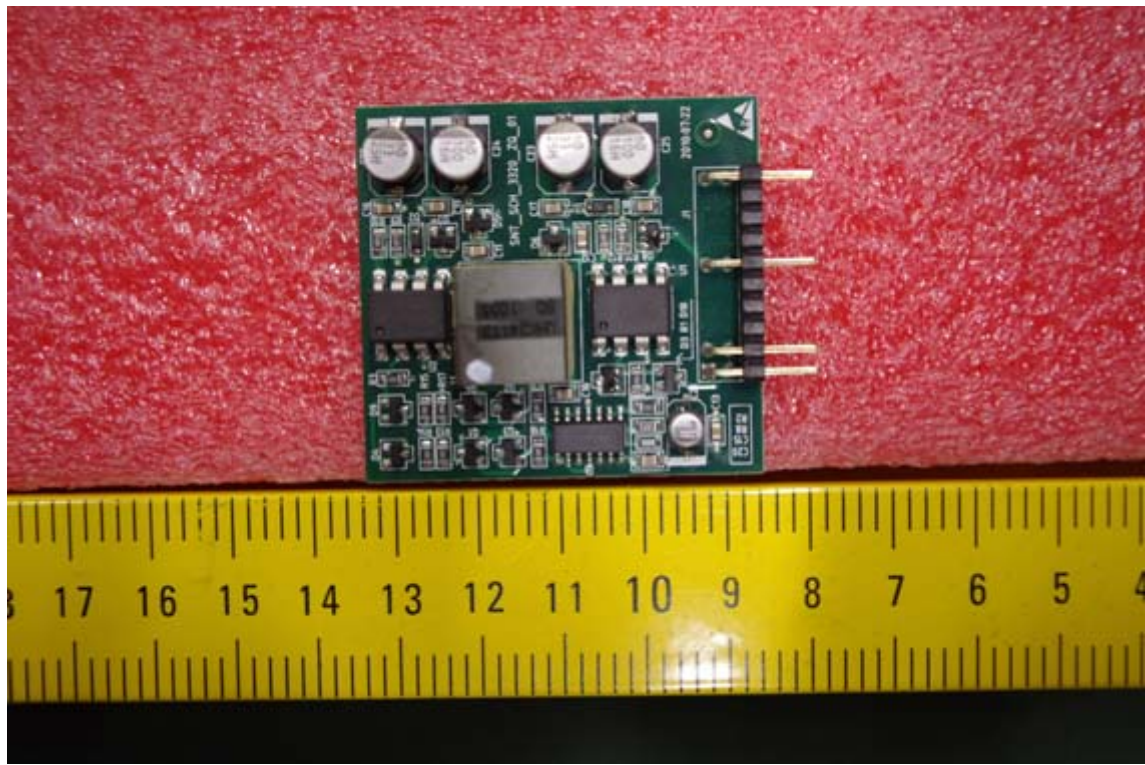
Board SNT_PCB_3320_ZQ, component side view
